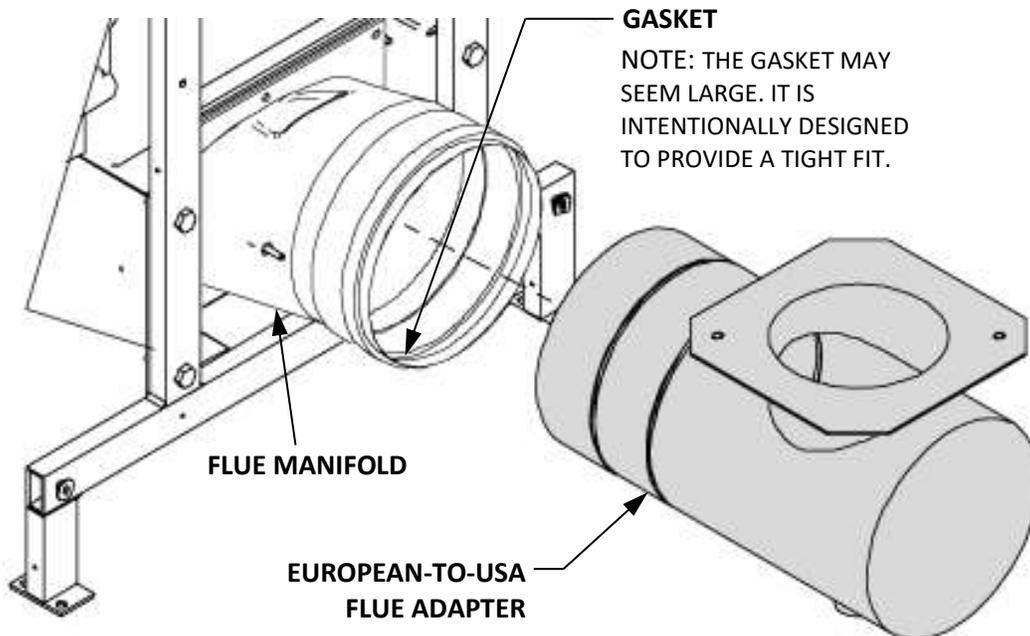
Assembly of European-to-American Flue Adaptor to Flue Manifold
